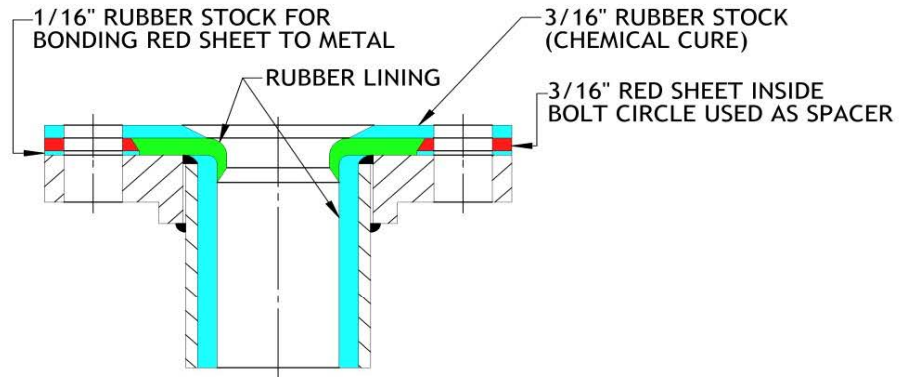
Internal steam cure vessel - Flange detail for outlets
